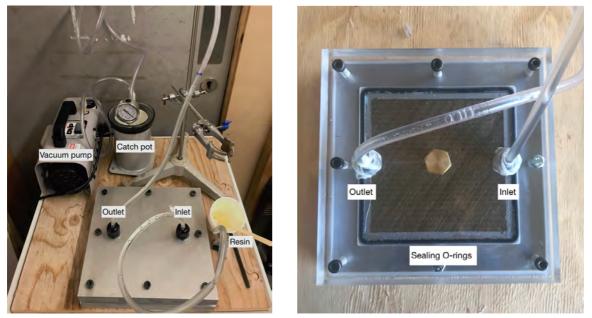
Manufacturing set-up and close up of fabric in the mould
